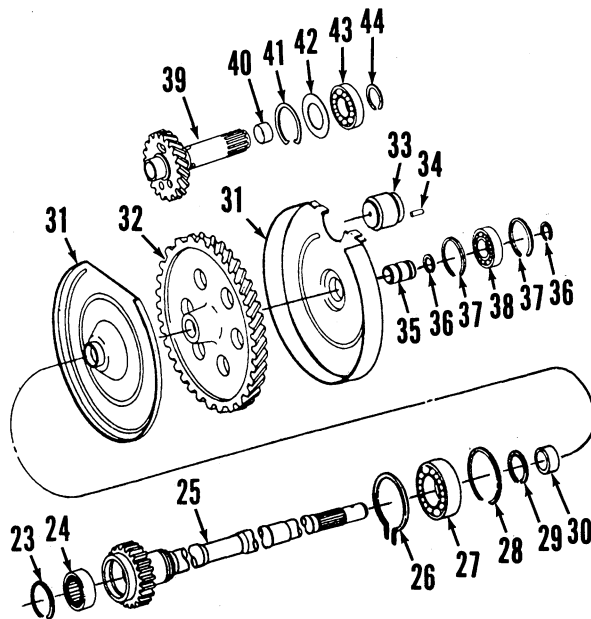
Exploded view of pto front section drive gears and associated parts used on 4050, 4250 and 4450 Quad-Range models not equipped with MFWD.
